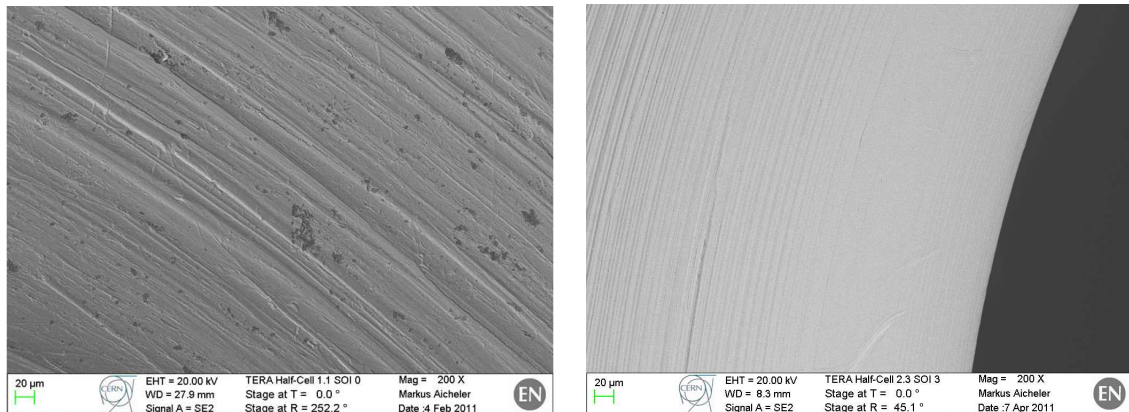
Surface of a normal-machined halfcell (left) and a diamond-tooled one (right) with the same magnification. The diamond-tooling machining provides a better finish of the cell surface.
